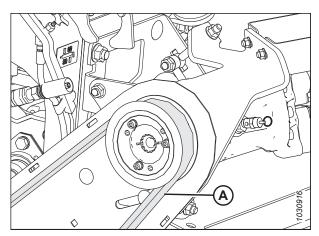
Drive Pulley - Conditioner Drive Motor
